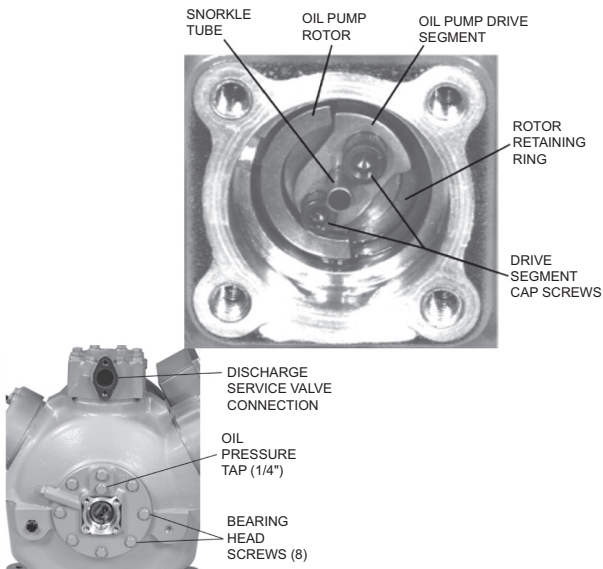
Removing Pump End Bearing Head (06D Compressor)
